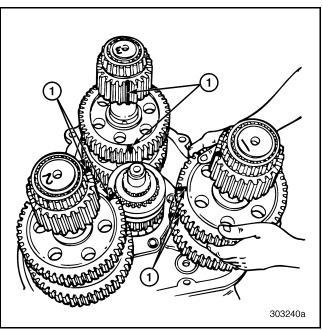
Removing Compound Countershafts (T313L/T318L Shown)
